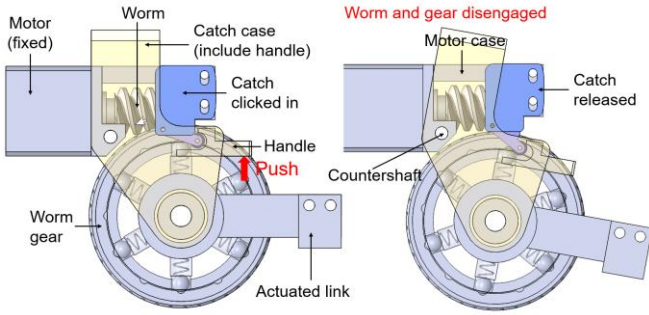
Schematic representation to illustrate the working mechanism of the manual override clutch. Pressing the handle will trigger the clutch, causing the catch to be released. Pressing the handle again will reset the clutch.
